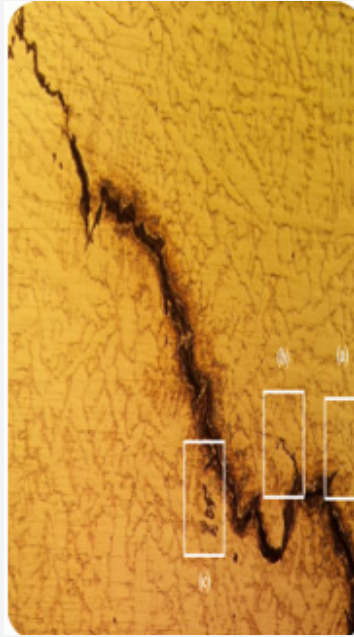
Macro view of the crack after penetrant test.
